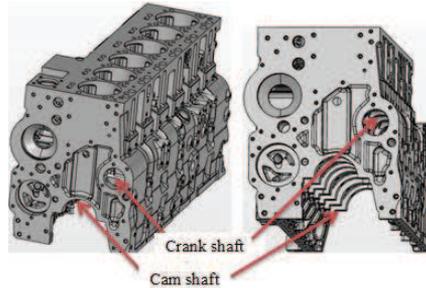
Part features - Cam and crankshaft of an engine block in different views.
